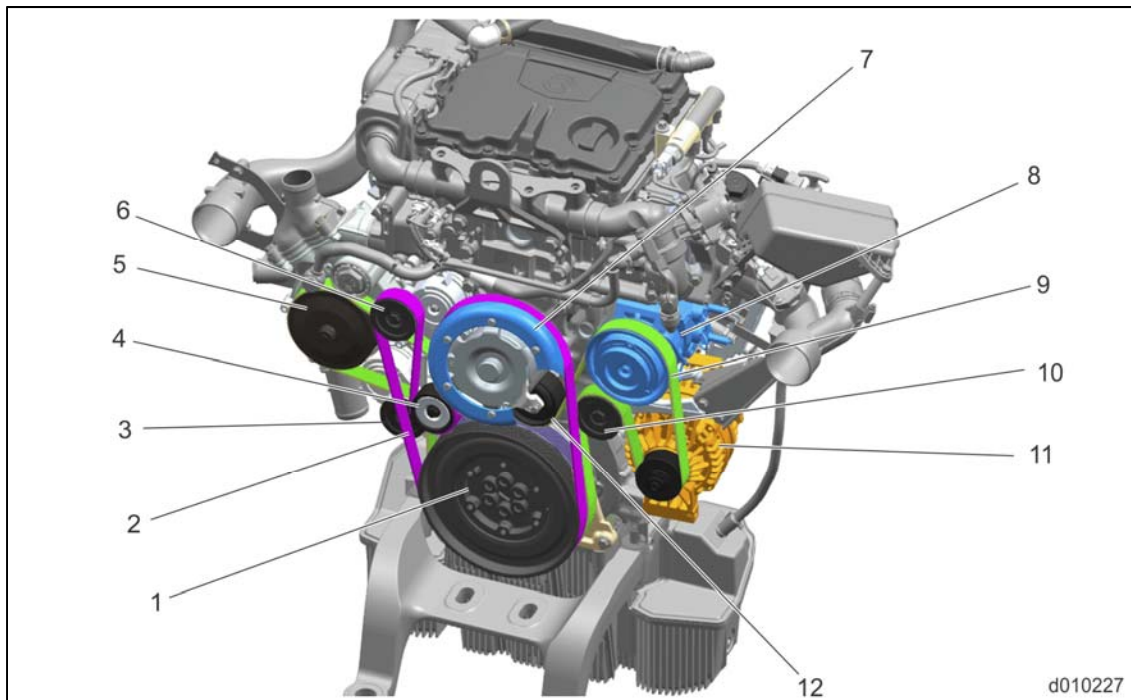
Fan Drive Idler Pulley and Fan Drive Belt Tensioner Location
